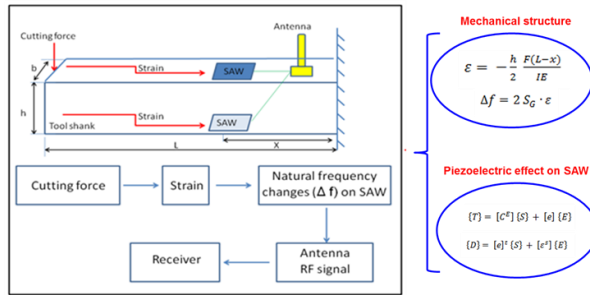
Schematic and flowing chart demonstrating the principle of using SAW sensors to detect cutting force in machining
